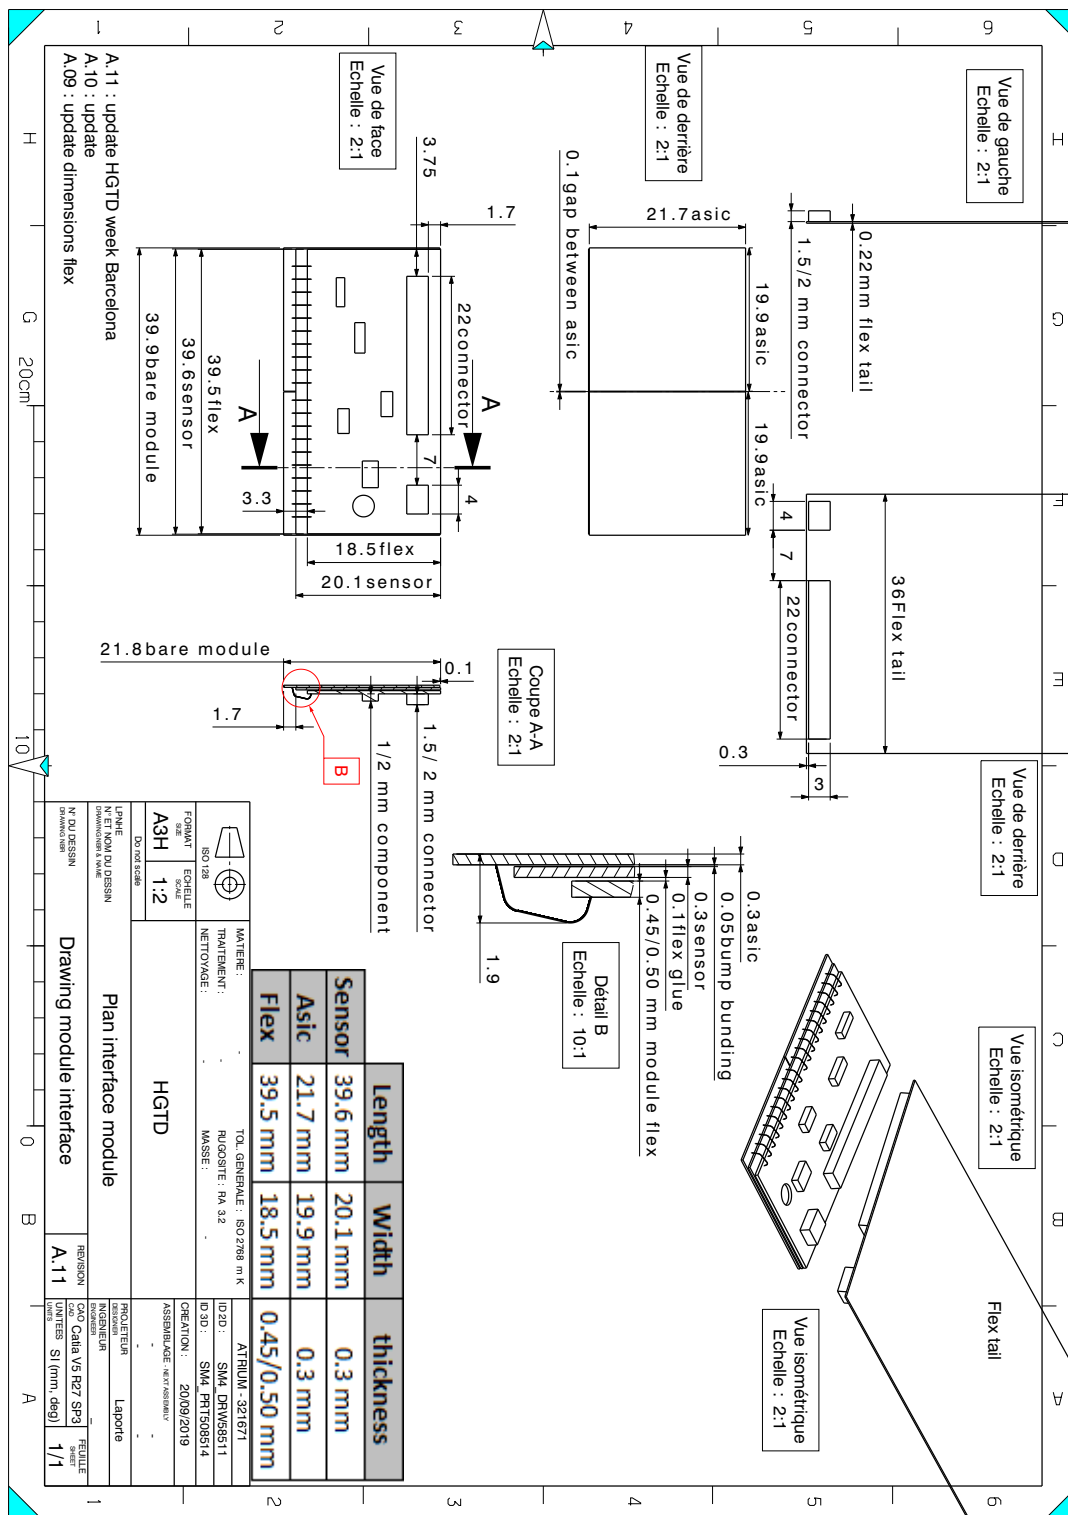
Sketch of the module with the sensor, the ASICs and the Flex cable. Distances are in millimetres. Dimensions of the different components are visible, including the bumps pads, the glue and the wire-bonds.
